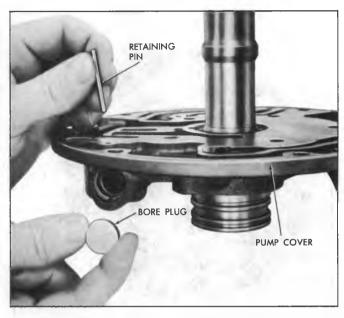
T--Installing Pressure Regulator Retaining Pin and Bore Plug
